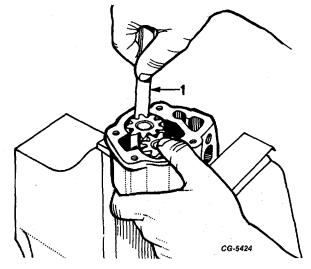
Measure Pump Gear-to-Body Clearance 1. Gauge
